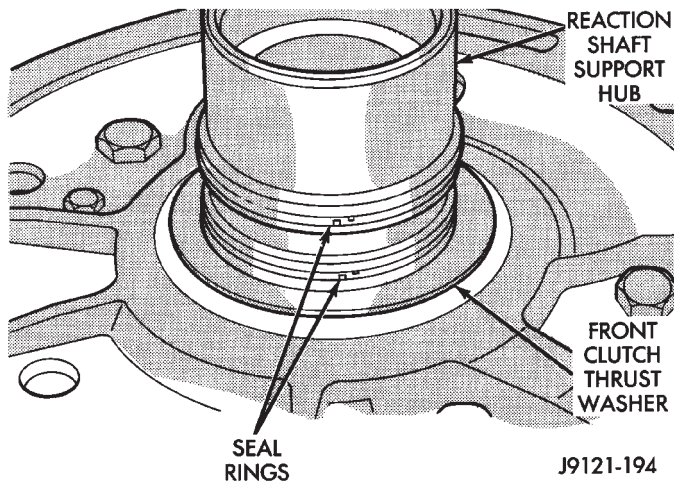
Reaction Shaft Support Seal Rings And Front Clutch Thrust Washer
